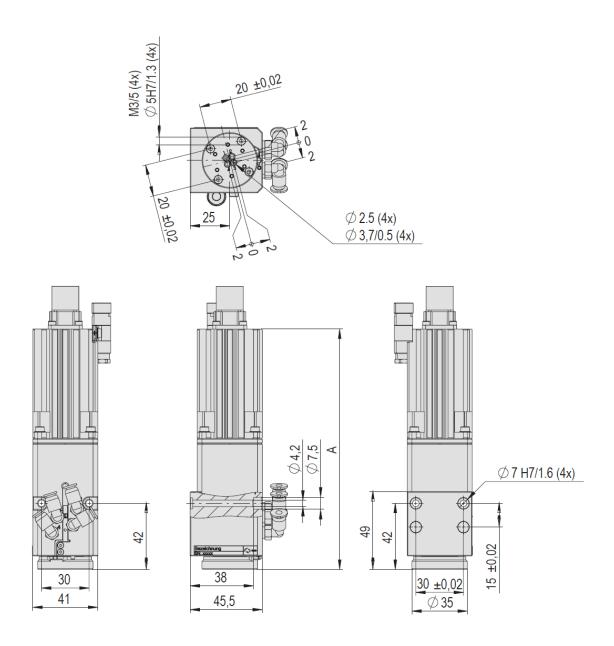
Dimensional drawing rotational axis RA-40-4F
